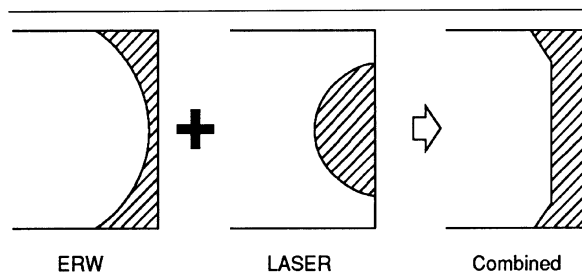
The concept of uniform heating produced by laser-assisted electric resistance welding.
